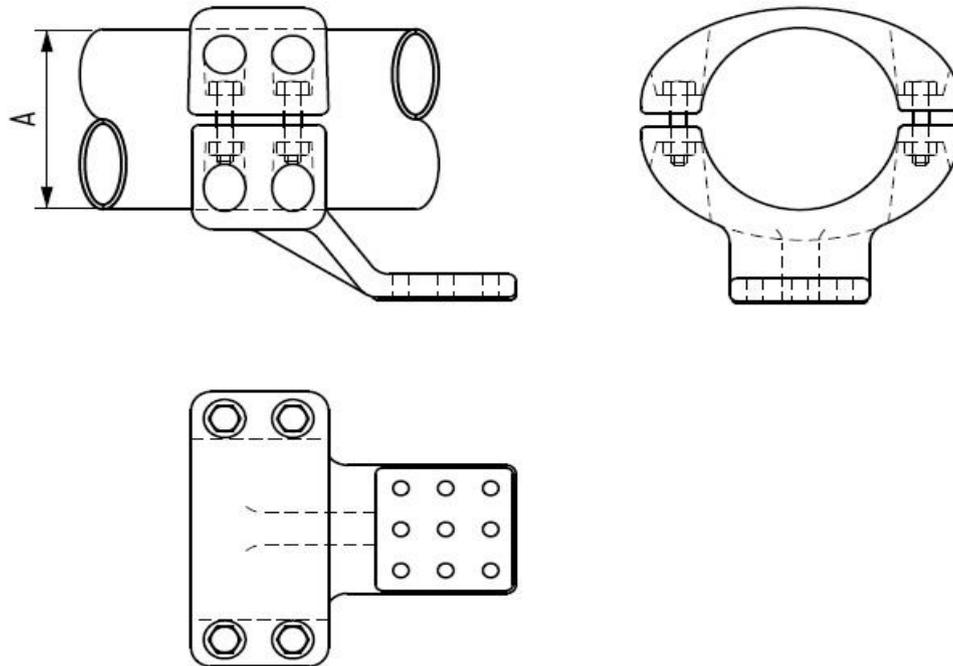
ECC-9HH-EE: Coupling Clamp – 9-Hole Horizontal Palm – Elevated Equipment Mounted
